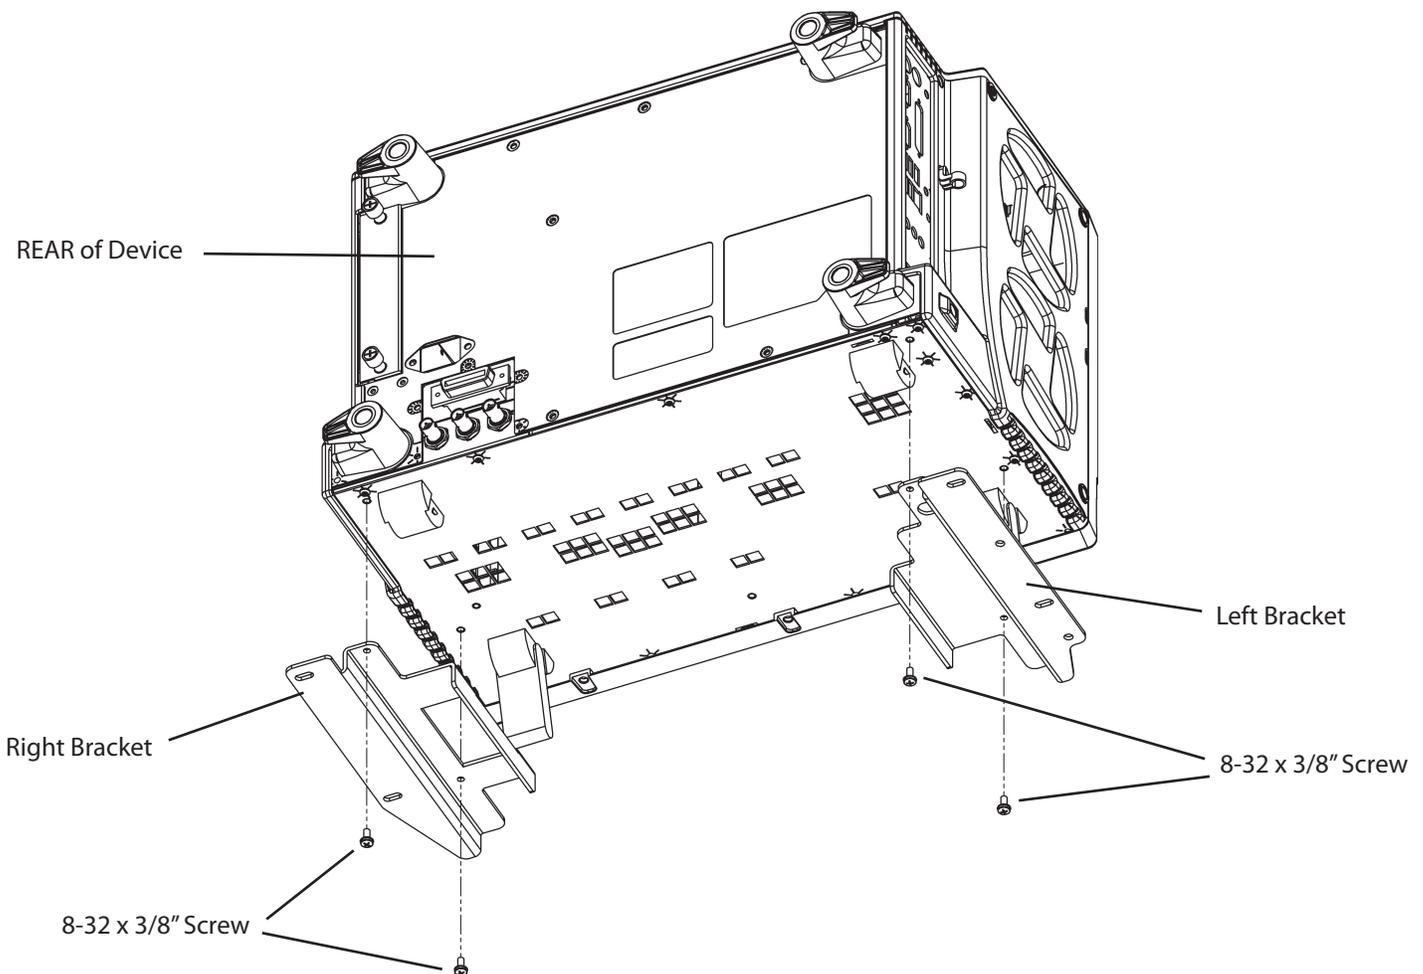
Installing The Brackets, Shown On DPO7000 Series Device
